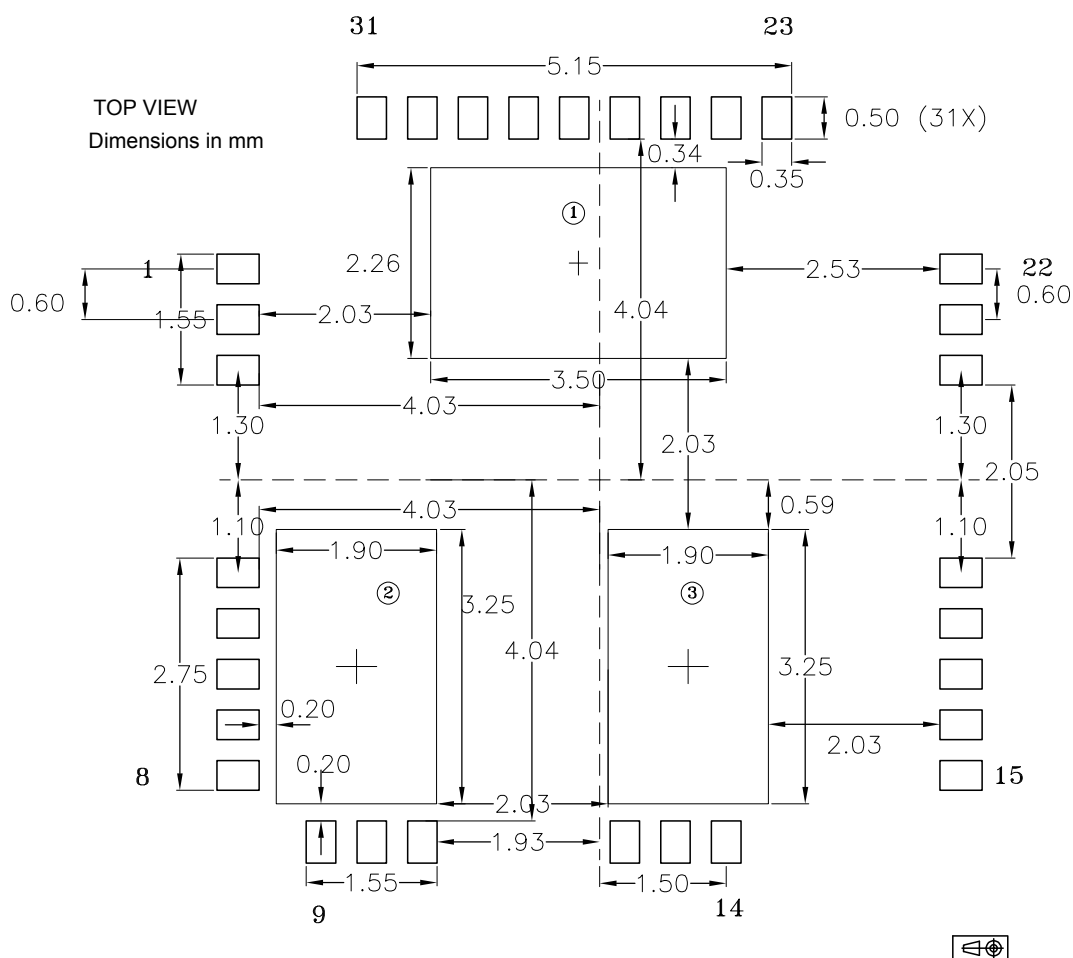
QFN 9 x 9 x 1 mm package dimensions
